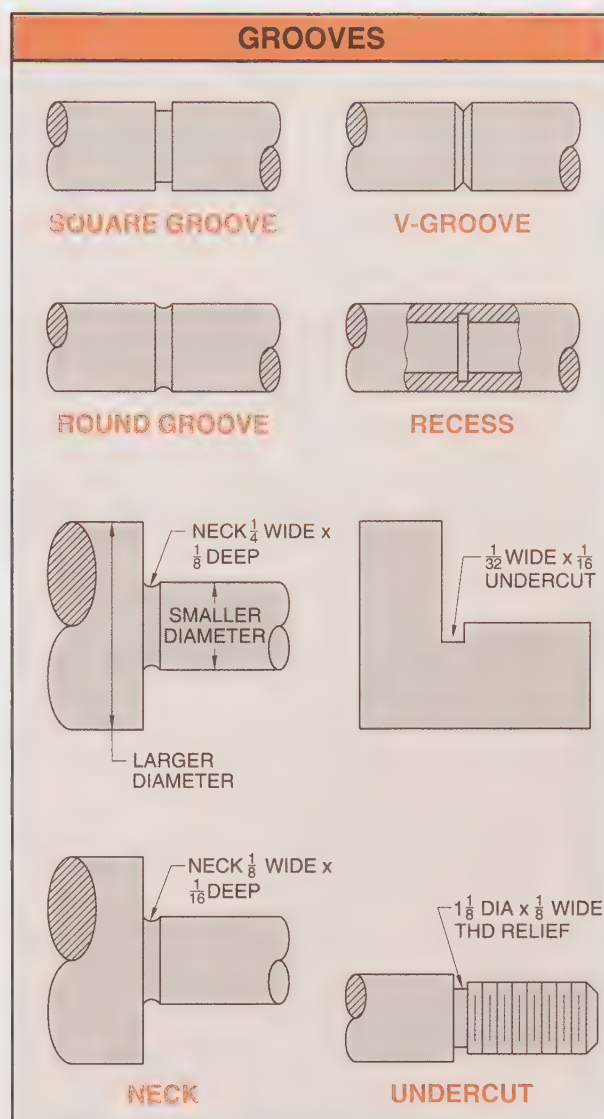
Grooves are machined below the surface of the material to provide clearance and bearing surfaces.
